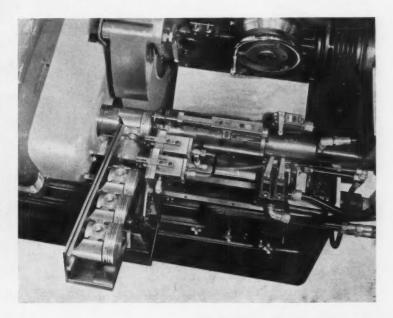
Automatic piston-grinding machine developed by the Landis Tool Co.
